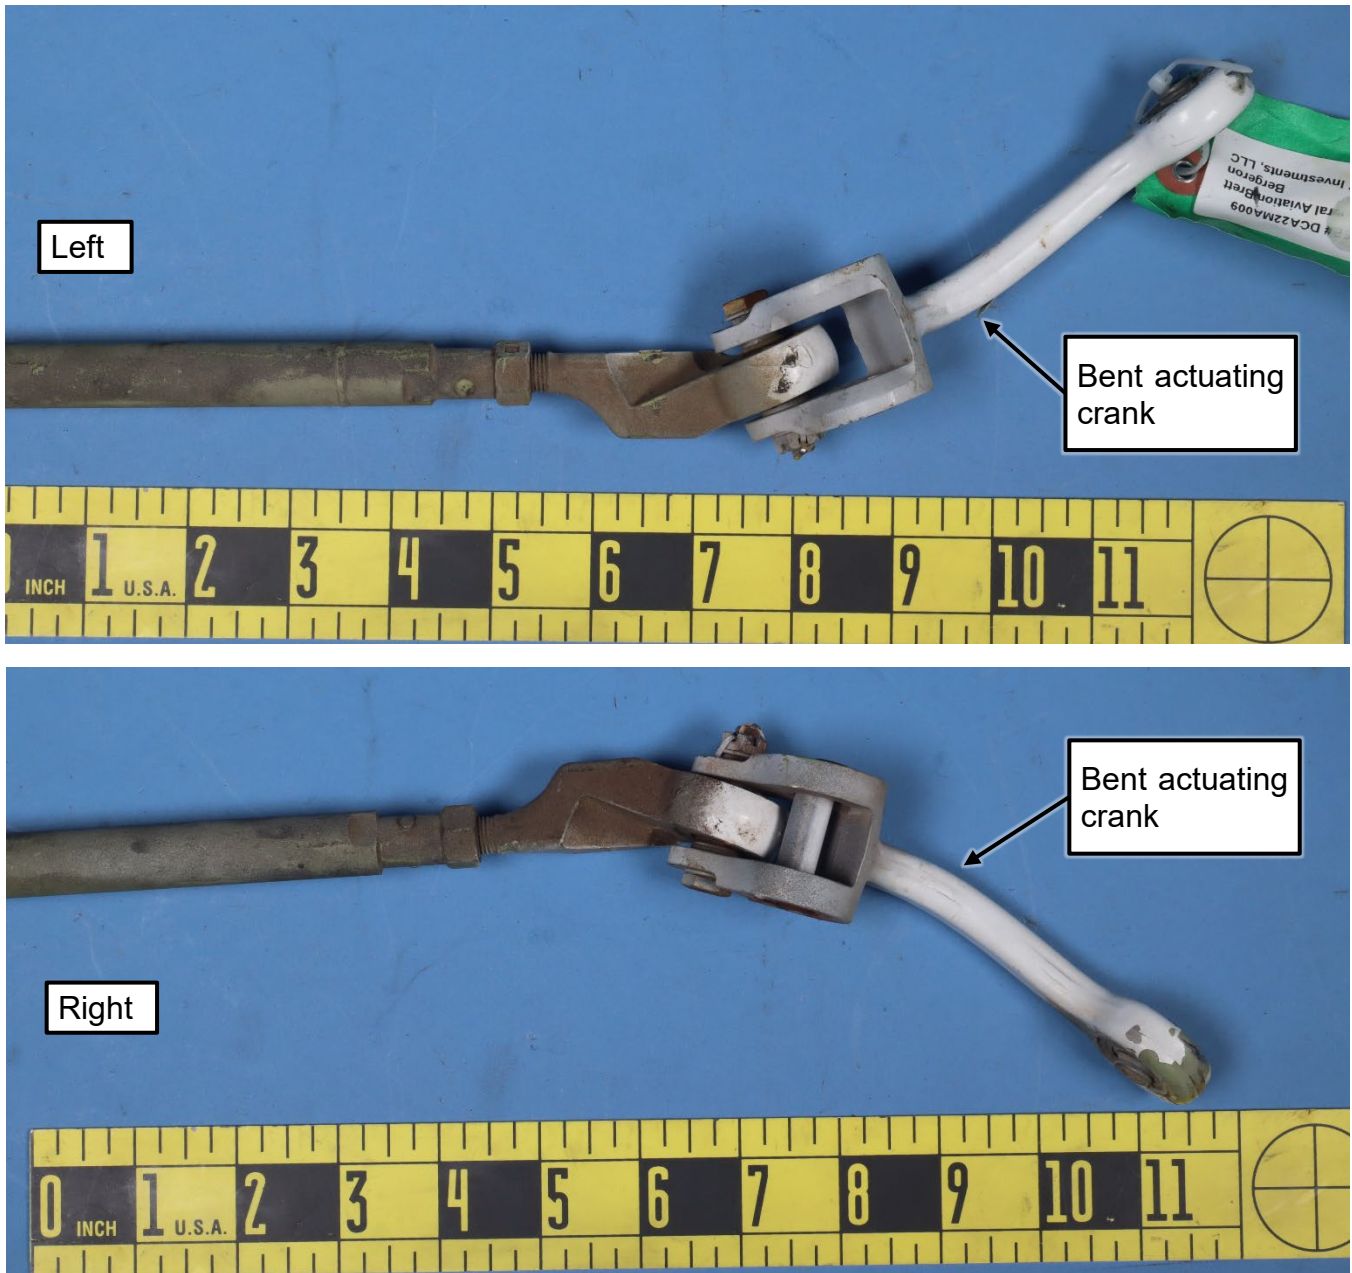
Forward ends of the left and right pushrods showing closer views of the bent actuating cranks.
